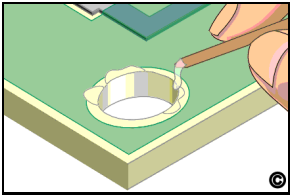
Apply Epoxy with a mixing stick sharpened at one end.
